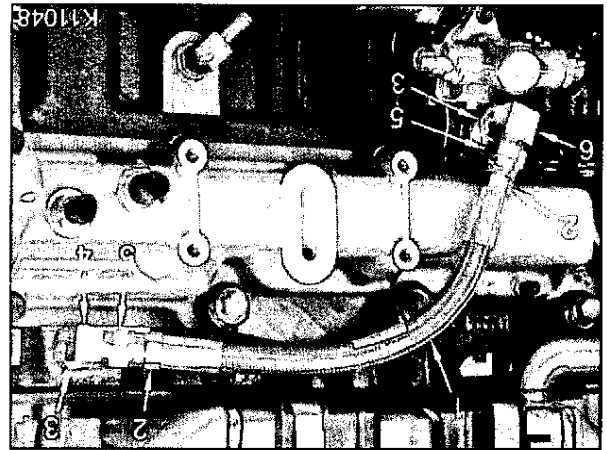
Good position and alignment of new high-pressure oil hose (typical)
